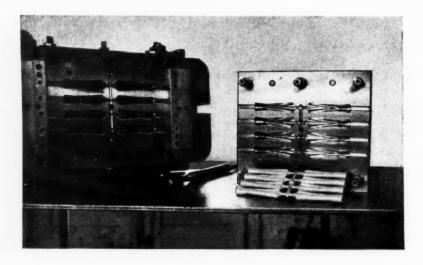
Injection Mold for Brush Handles, Including Mechanism for Withdrawing Cores (Courtesy Guy P. Harvey & Son)
